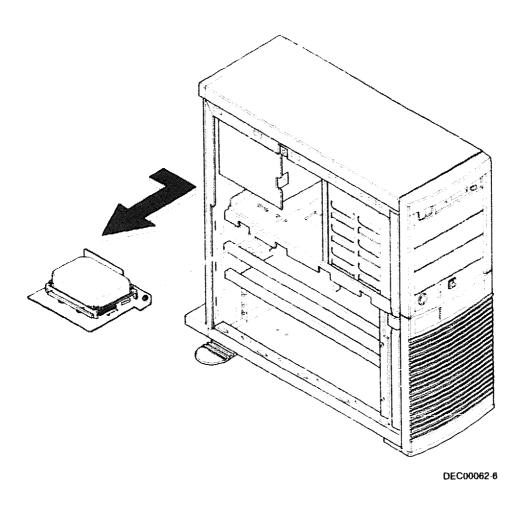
Removing the 3 1/2-Inch Drive (Internal Bay)
